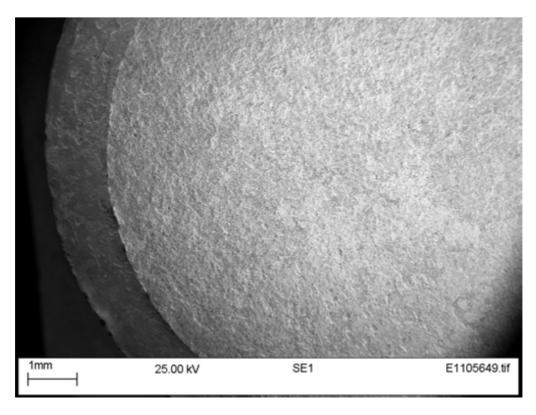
SEM fractograph, showing crack origin region of a second fracture half exhibiting fatigue fracture.
